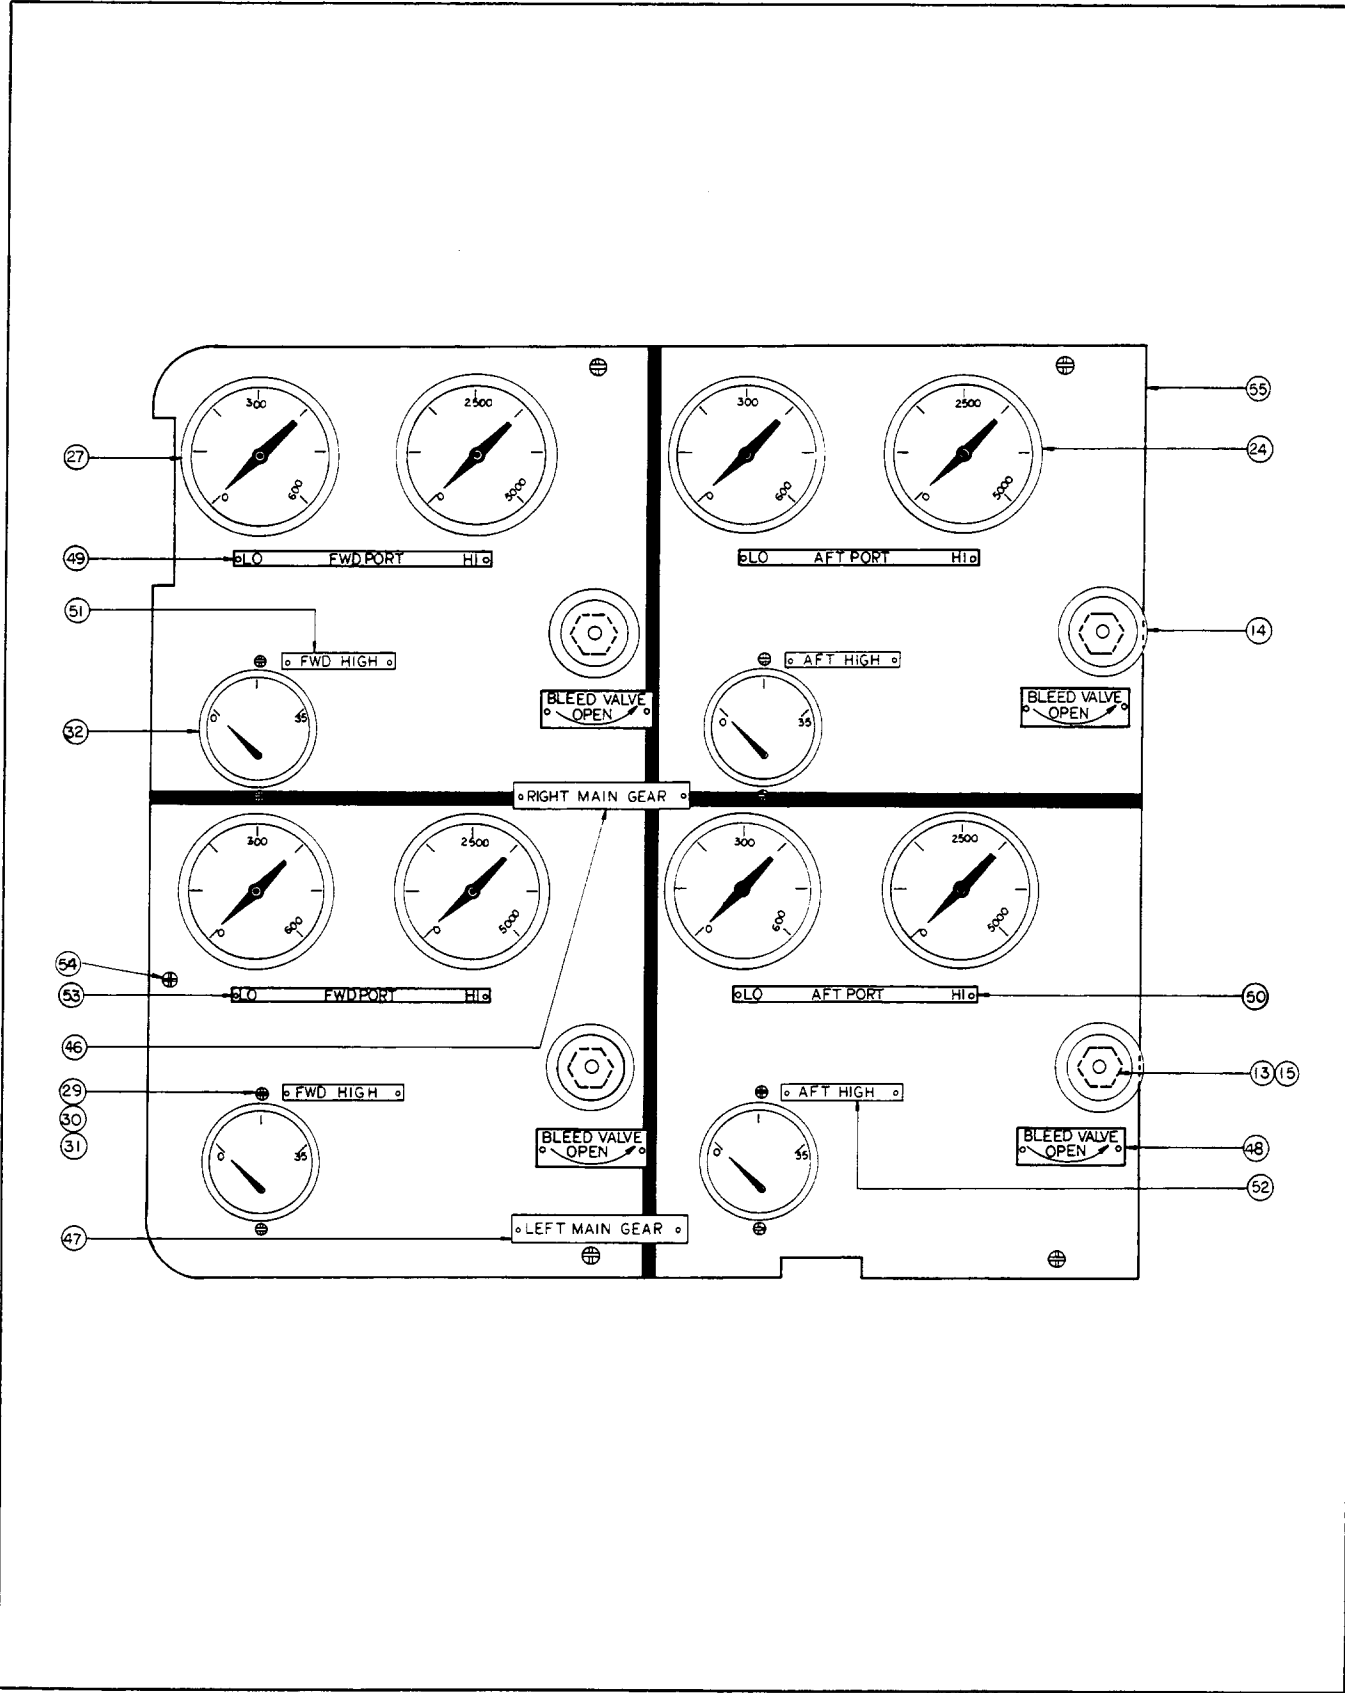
Panel Assembly (Sheet 1 of 3)
